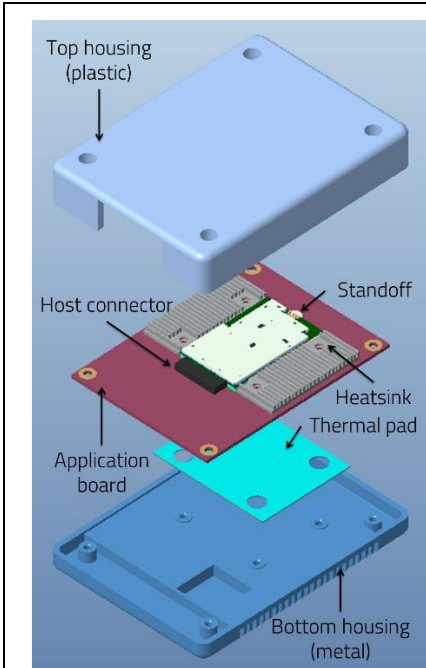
Plastic housing on top and metal housing on bottom, heatsink between PCB and application board (Simulation [Figure 9-23](#))
